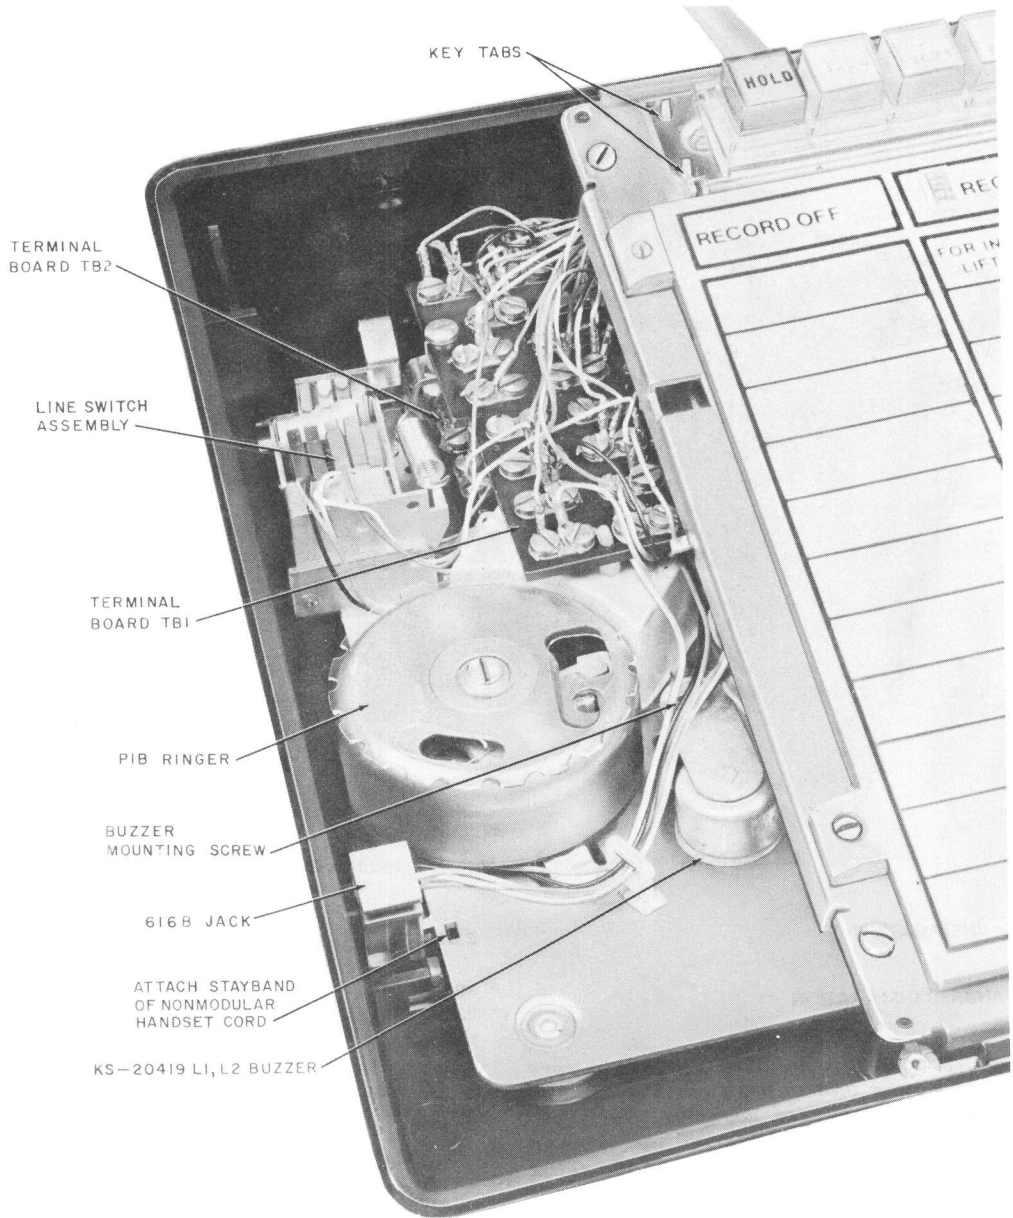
872A1M Telephone Set With Faceplate, Upper Housing, Handset, and Handset Cradle Removed
